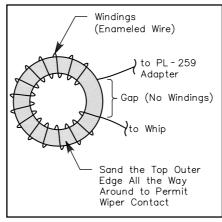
Winding the ferrite core with approximately 60 turns of #26 enamel wire. Note that you must sand the windings along the top outer edge to remove the enamel coating so that the brush can make contact.
